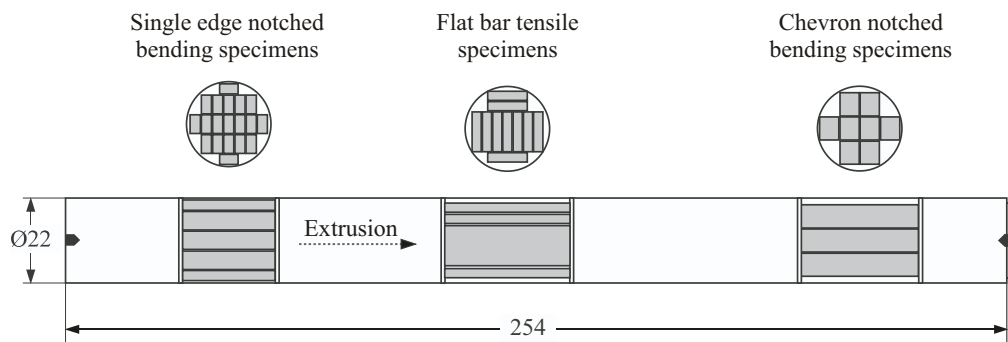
Extruded rod of γ TAB alloy with specimen sections.
